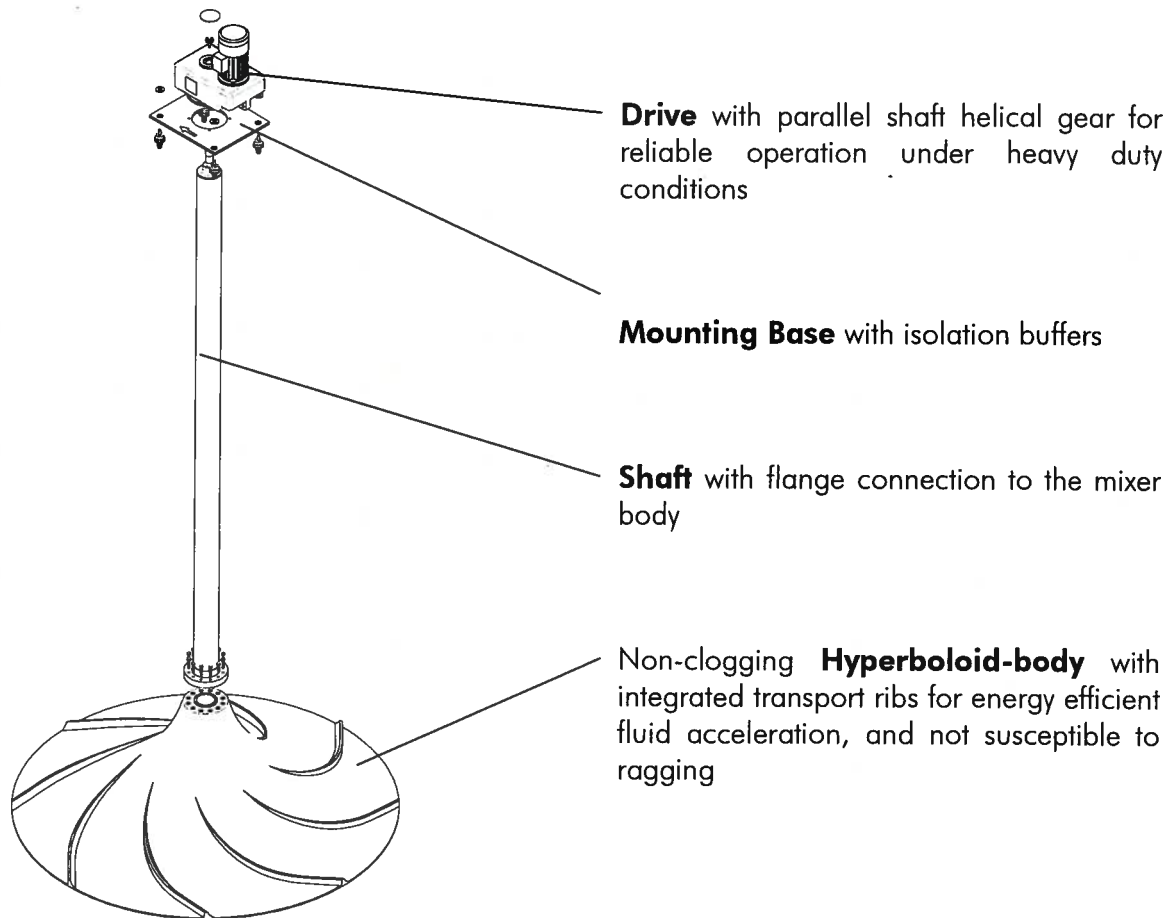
Exploded view on a Hyperboloid Mixer with top mounted drive
